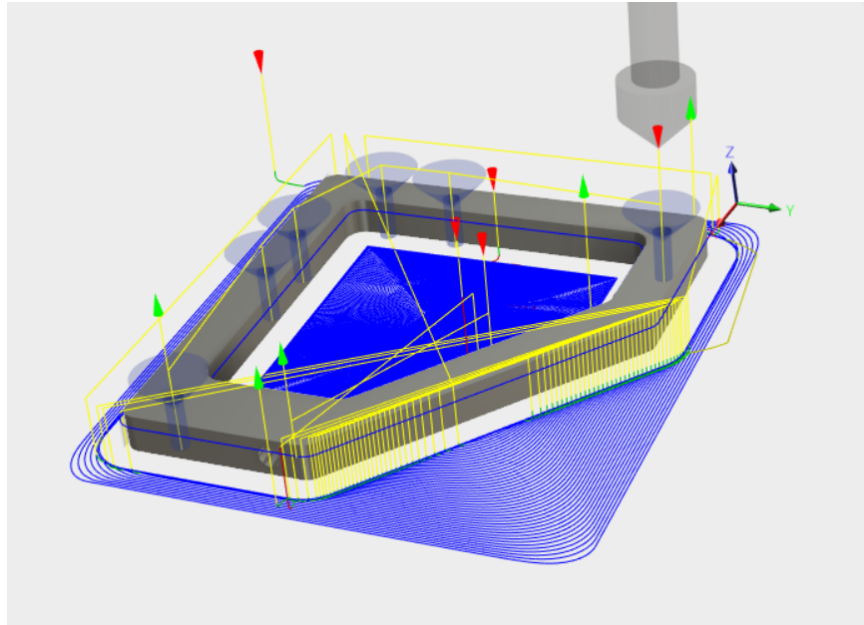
The toolpath generated in Fusion360 for machining one of the motor mounts. Adaptive clearing was utilized to keep cutter engagement.
